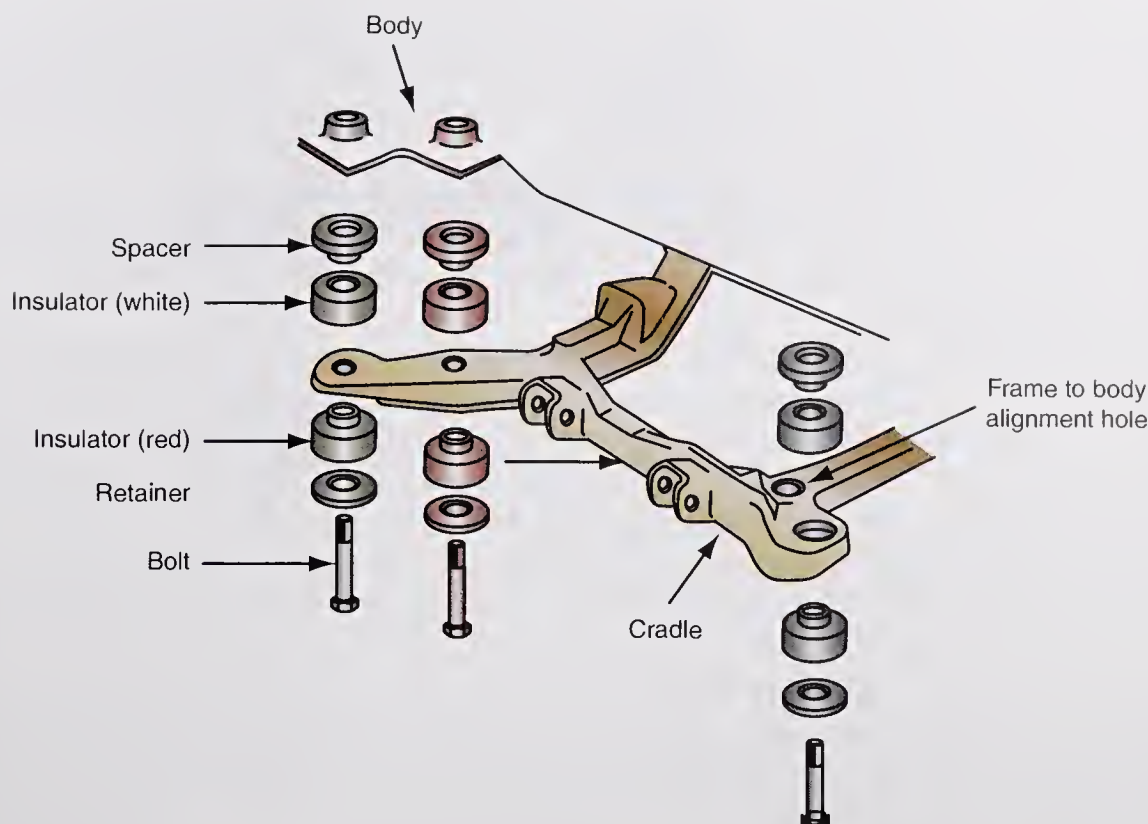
Cradle insulators and alignment holes in cradle and body.
